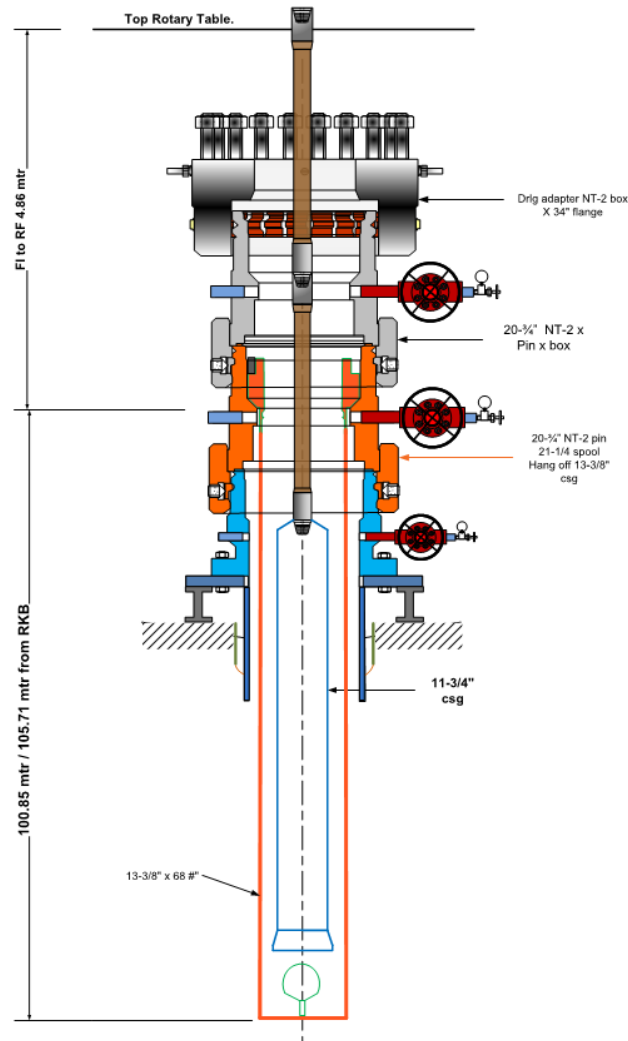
Wellhead dimensions and depths relative to the rig floor. Drawing provided by the test rig team
